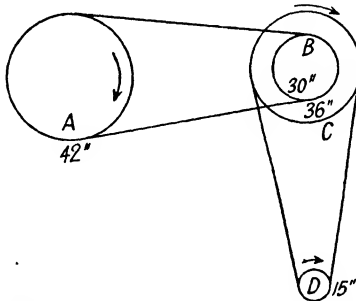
COMPOUND PULLEY DRIVE (4 PULLEY WHEELS)
